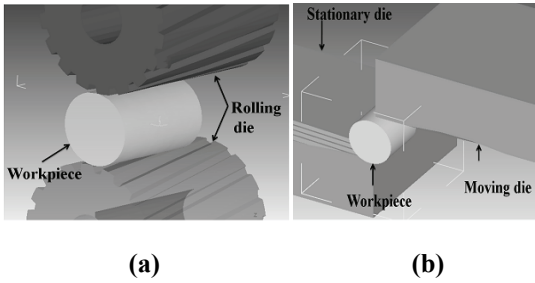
Thread rolling process using (a) roll die and (b) flat die
